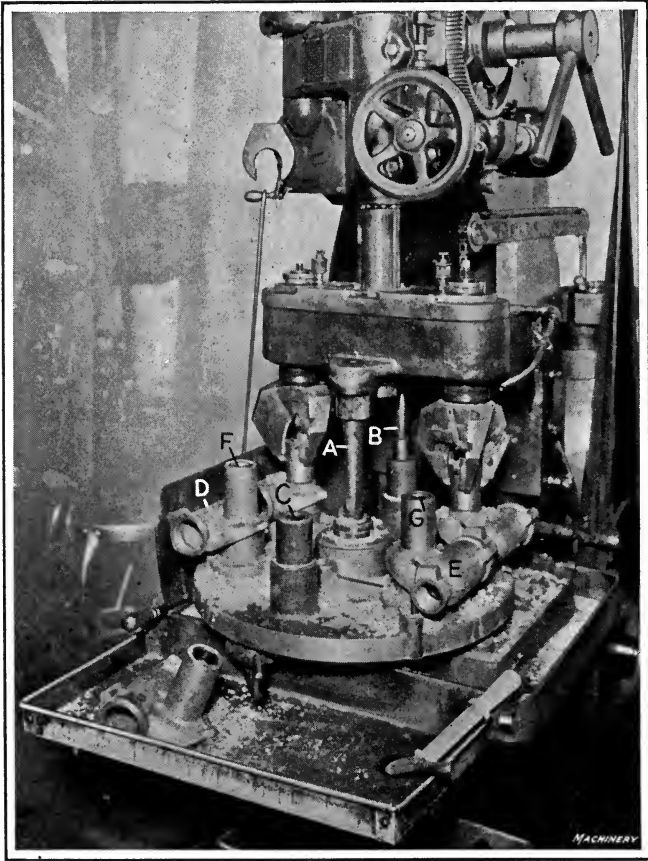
High-duty Drilling Machine equipped with Indexing Fixture and Two-spindle Head for Hollow-milling Steering-gear Housings
